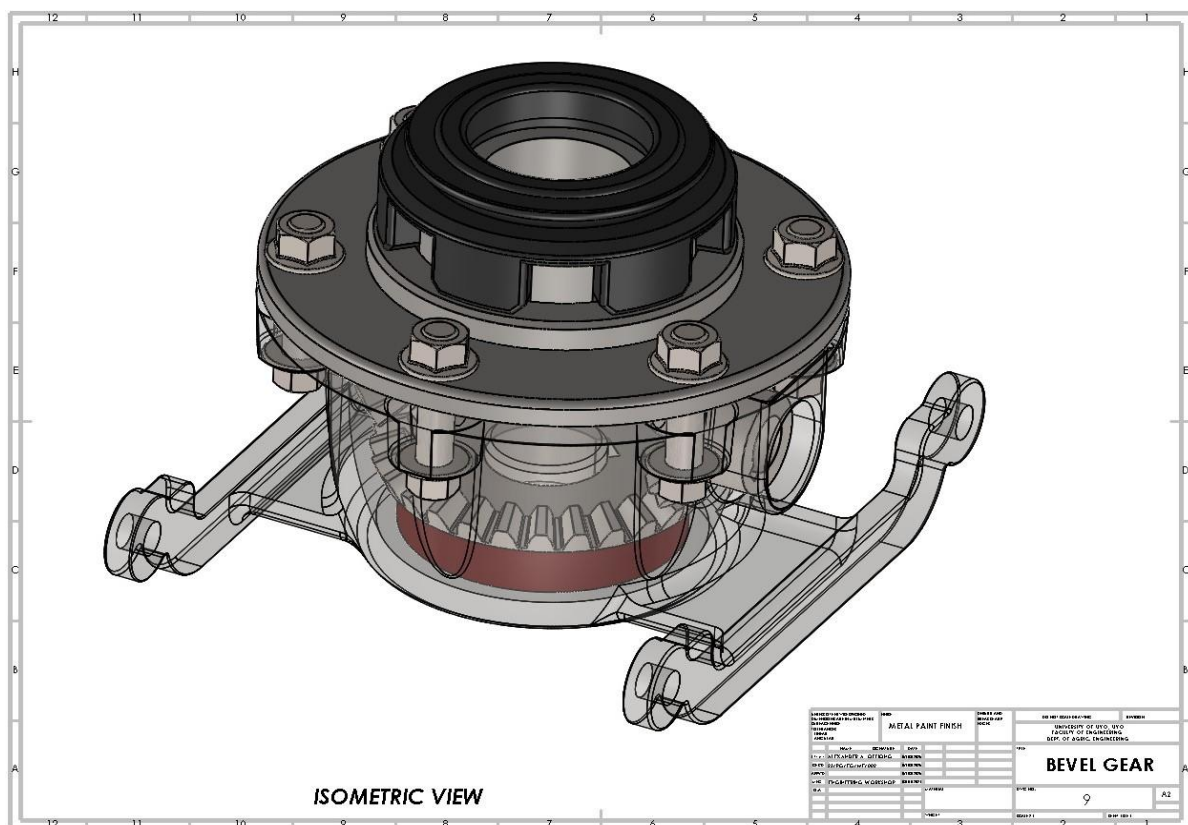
Component drawing of the vertical palm fruit digestion machine (Bevel Gear) by Reseracher (2025)
